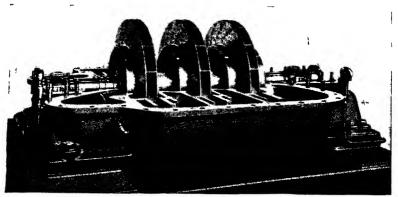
A three-stage centrifugal blower with fabricated impeller wheels." (Courtesy of Allis-Chalmers Manufacturing Co.)
